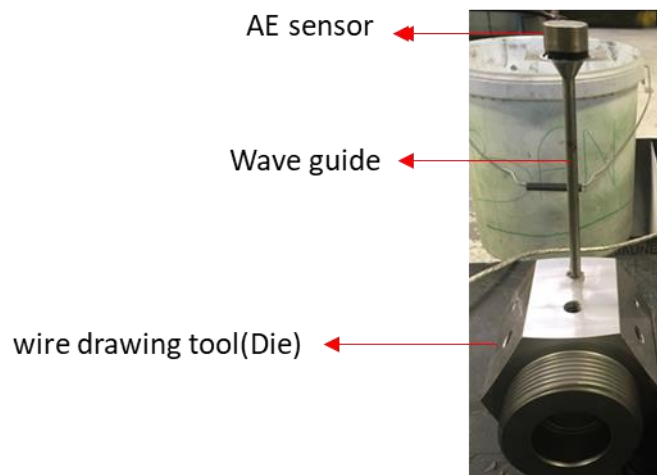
Instrumentation of the wire drawing tool by AE sensor.
